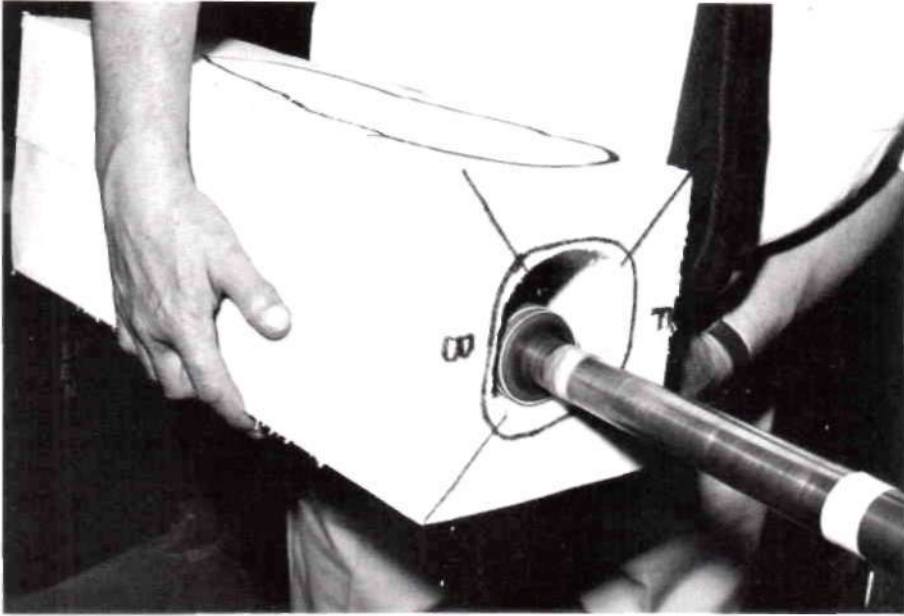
The hole is enlarged on the router. Maximum depth of hole is indicated by masking tape on router shaft.
